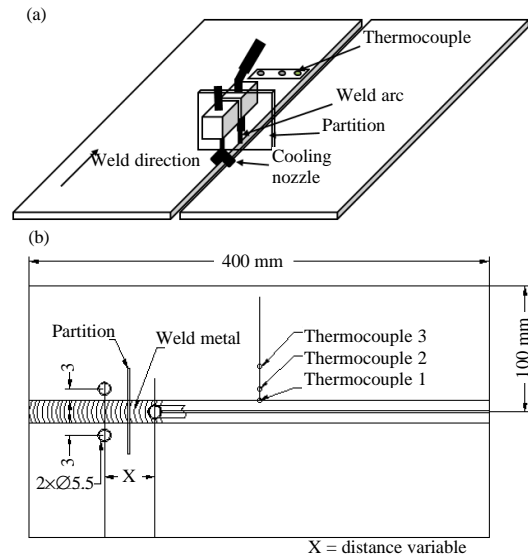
a) The skematic of DC-LSND Double Cooling and b) Dimension of treatment
